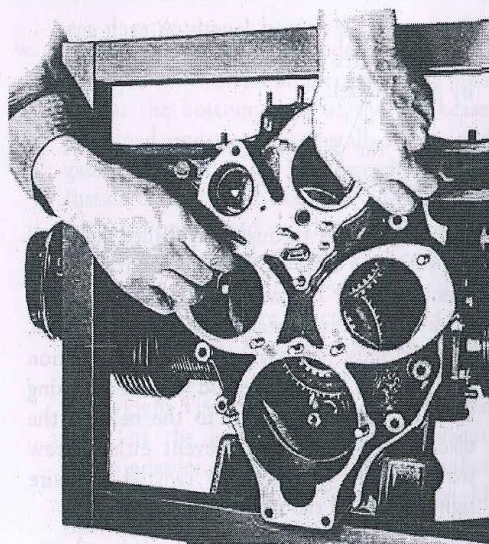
Installing Crankcase Cover on -12, -14, -16 and O-200 Models.
